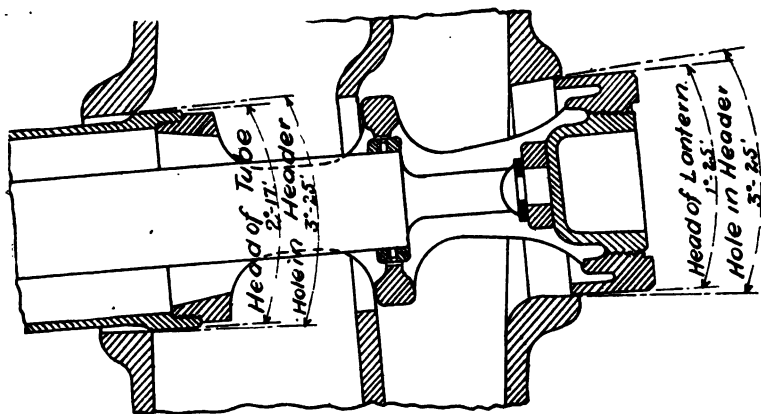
Section through Tube, Lantern, and Header. Showing respective positions when Lantern Cone begins to bear.
